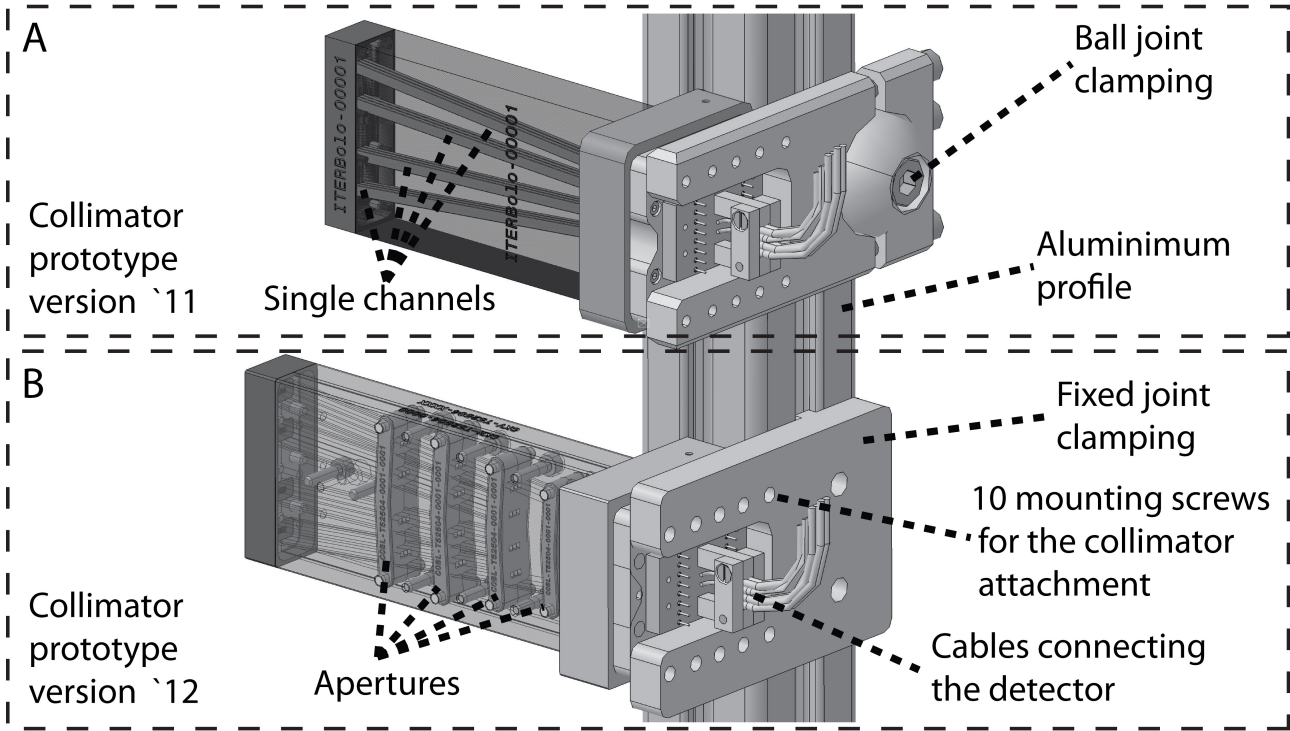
The two bolometer camera clamping elements for the laboratory measurement setup mounted on an aluminum profile rod. Version A on top is equipped with a ball joint and version B on the bottom with fixed horizontal clamping orientation. Cables, mounting screws and apertures are indicated.
